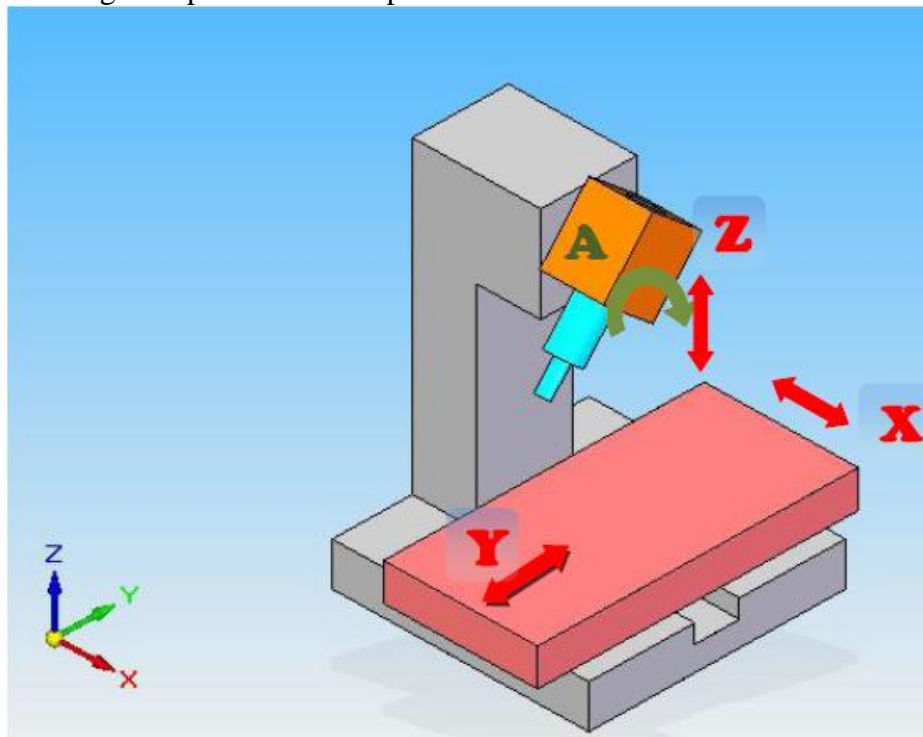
(a): Isometric View of Machine head Rotate in 5-axis milling Machine.
